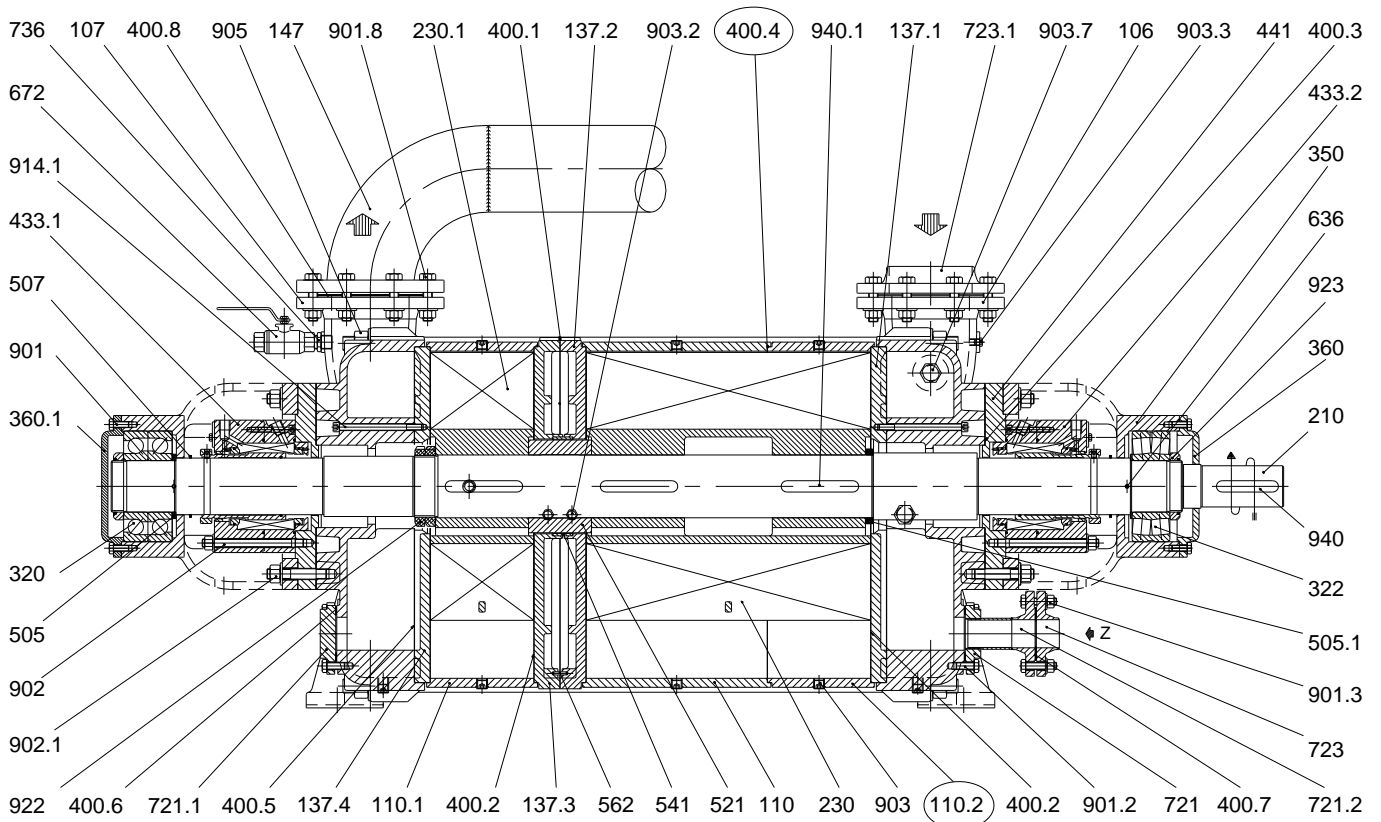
TYPICAL SECTIONAL DRAWING WITH "A CARTUCCIA" MECHANICAL SEALS - Series TRHA 150
